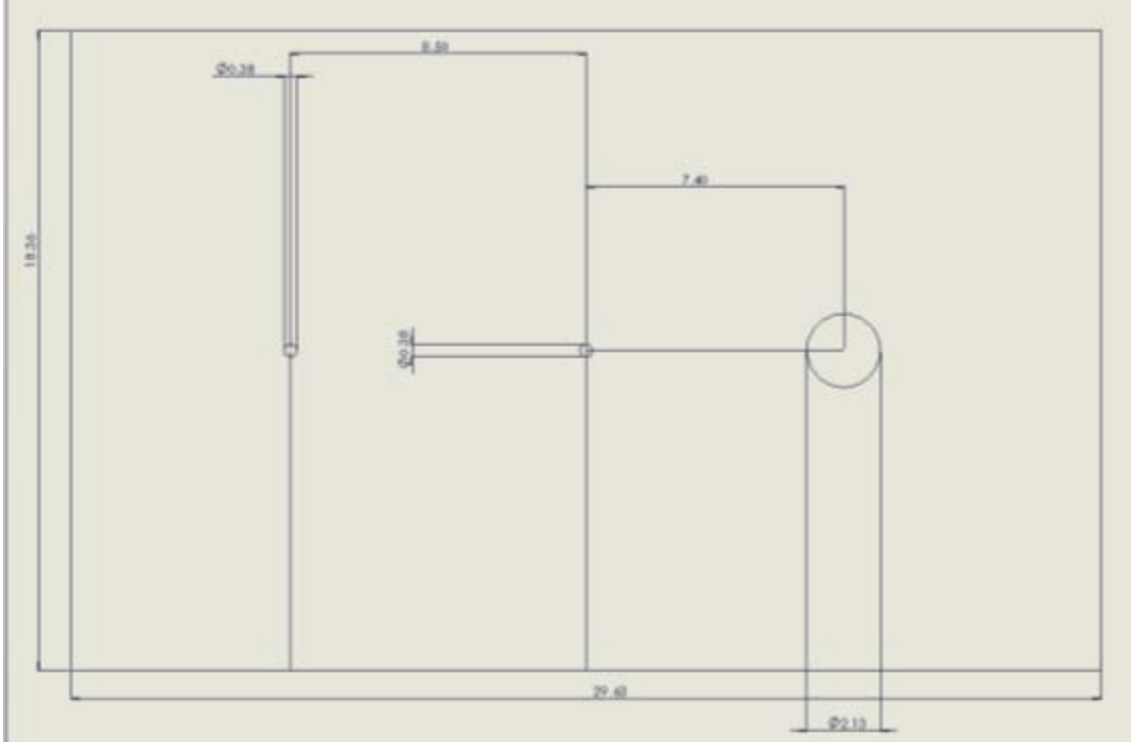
Reservoir 6_1 Dimensional Drawing
